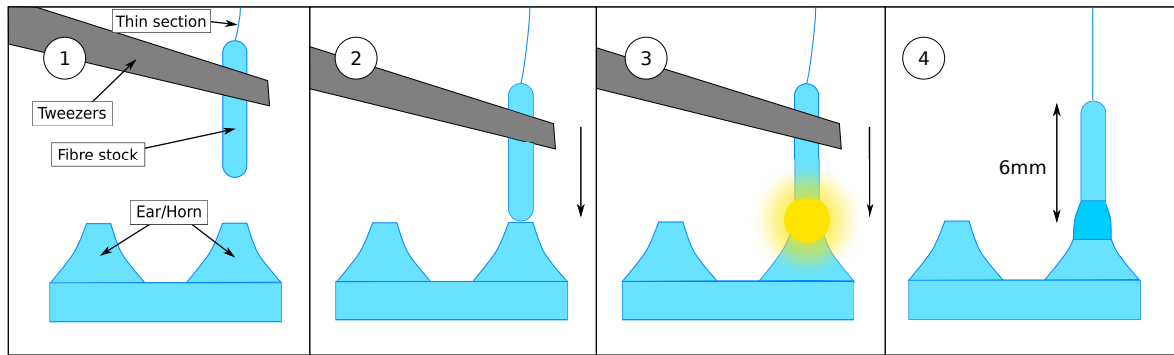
Schematic of a laser weld on a 100 g ear. Image 1 shows the initial set-up. The stock material is held by a set of tweezers. The thin section of the fibre is relaxed. Image 2 shows moving of the fibre stock to the ear horn until contact. In Image 3 the horn is heated until melting point and the stock is carefully fed into the weld. Image 4 shows the final weld. The stock is fed into the weld until the desired position of the start of the thin section is reached and it is just under tension.
